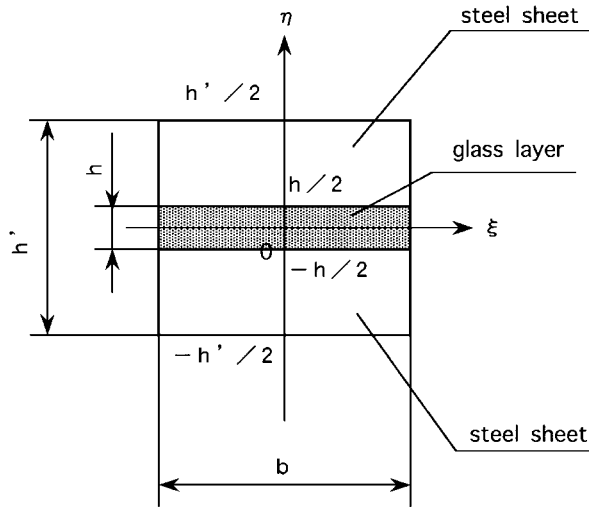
The model of superposition of the test piece. b; width of glass layer. h; thickness of glass layer. h'; thickness of superposition of the test piece.
